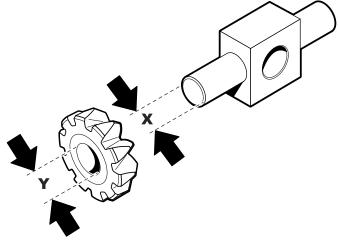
, Differential Pinion Shaft and Pinion Gears Clearance
